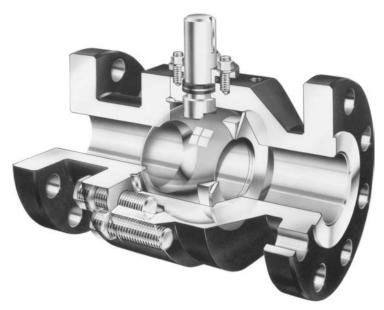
Full-port ball valve with floating seal. (*Courtesy of Vanessa/Keystone Valves and Controls, Inc.*)
